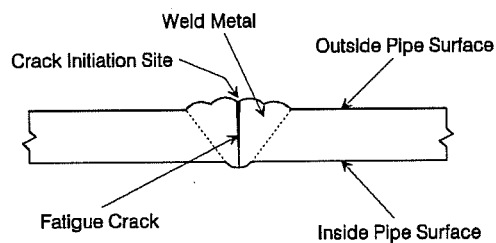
Fatigue Crack from Between Weld Passes
